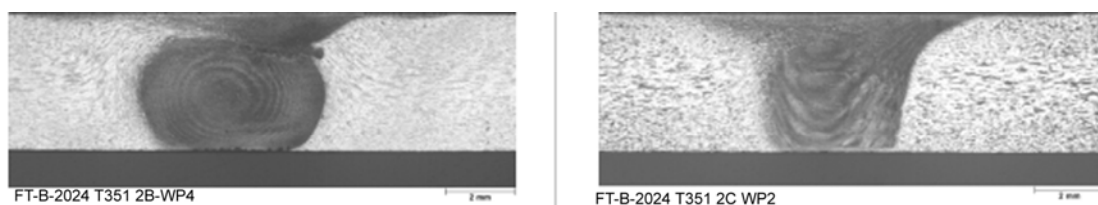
Macrographs of two friction stir welds as seen transverse to weld travel direction produced in 4mm thick Al 2024 T351 using identical tool shoulders but dissimilar tool pins, demonstrating very different flow patterns.
